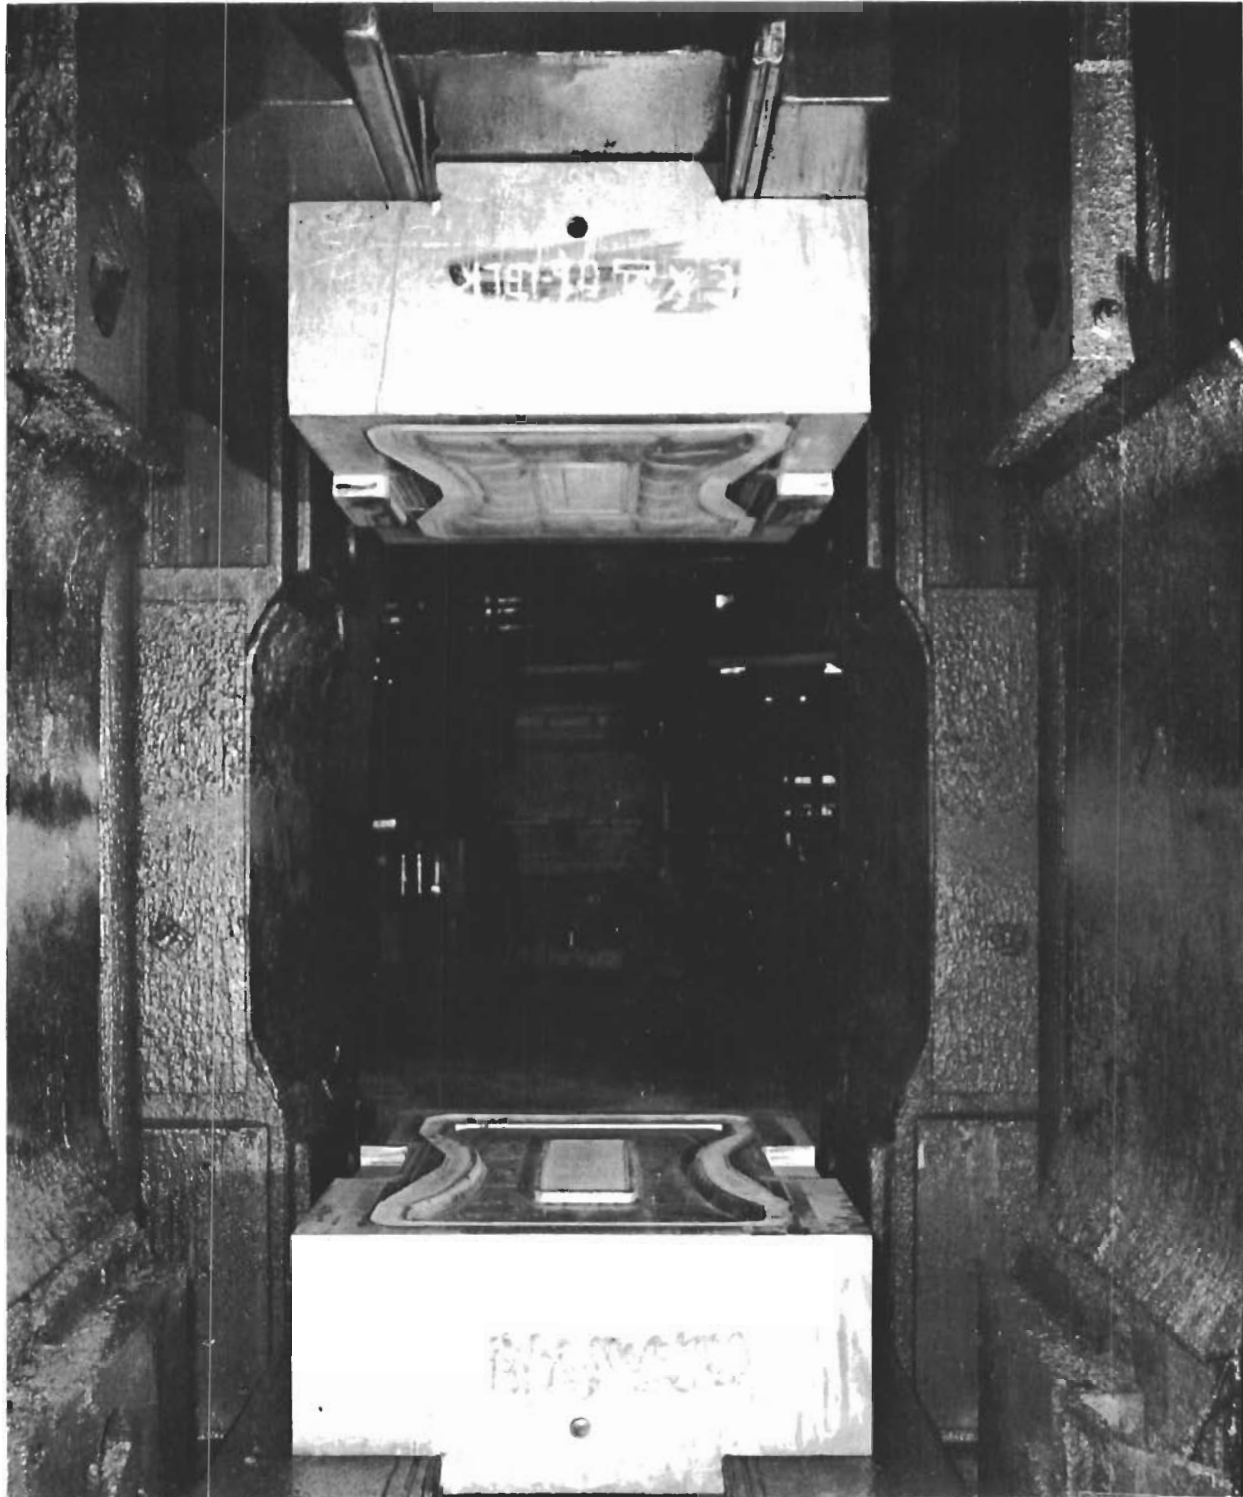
Dies for the Blocker Forging Operation with the 125,000 MKG Counterblow Hammer. Shown Installed in the Hammer.
